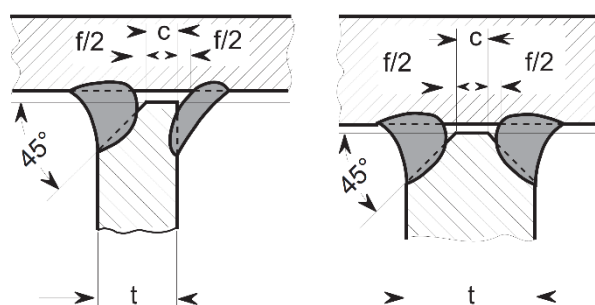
Single- and double-bevel welds with unwelded root face and defined incomplete root penetration
